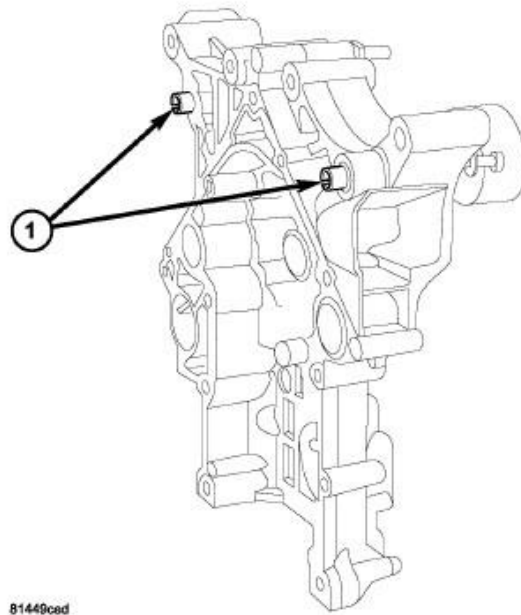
FRONT COVER SLIDE BUSHINGS
